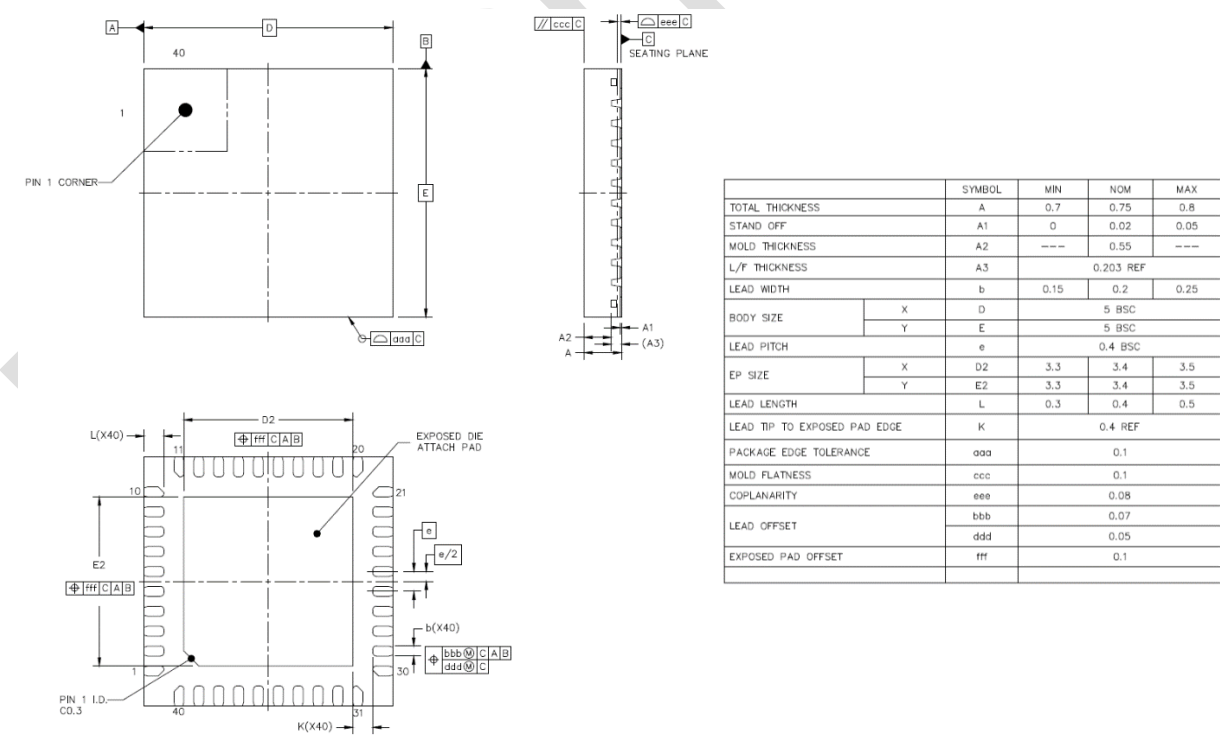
QFN40 (5 \* 5 mm) Package Outline Drawing
